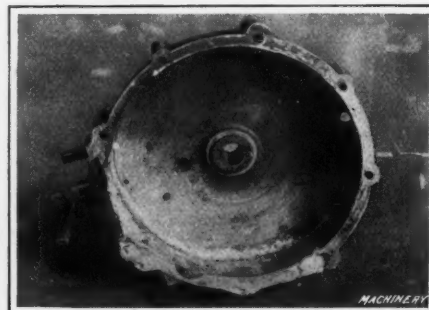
Same Crank-case as shown in Fig. 8—Finished Weld on Inside
